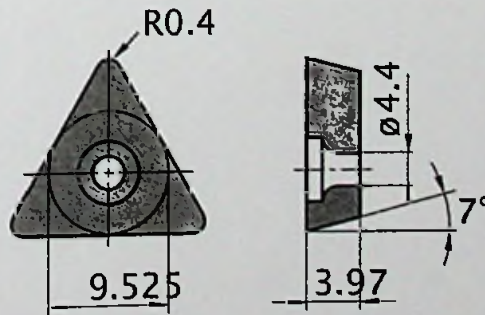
Cutting tool geometry of TCMT16T304 (Source:[44])
